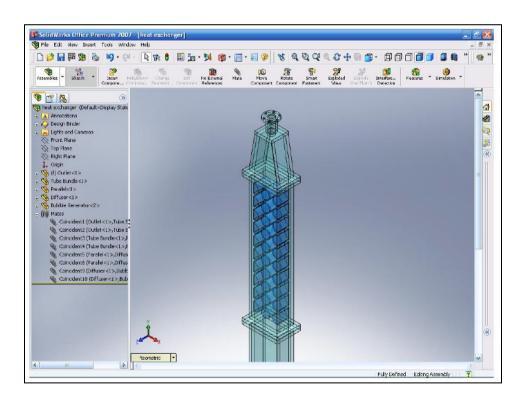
Assembly drawing of test section 38 mm in diameter in-line tube bundle, tube bundle and convergent section
